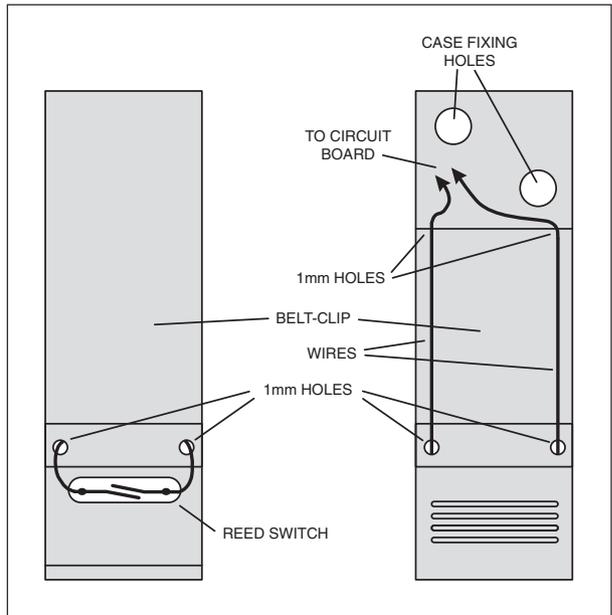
One suggested method of mounting and wiring the magnet-operated reed switch on the case belt-clip.
